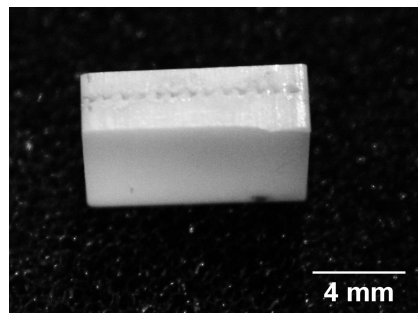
Sample 2 – a 3.76 mm thick fibre laser machined sample.
